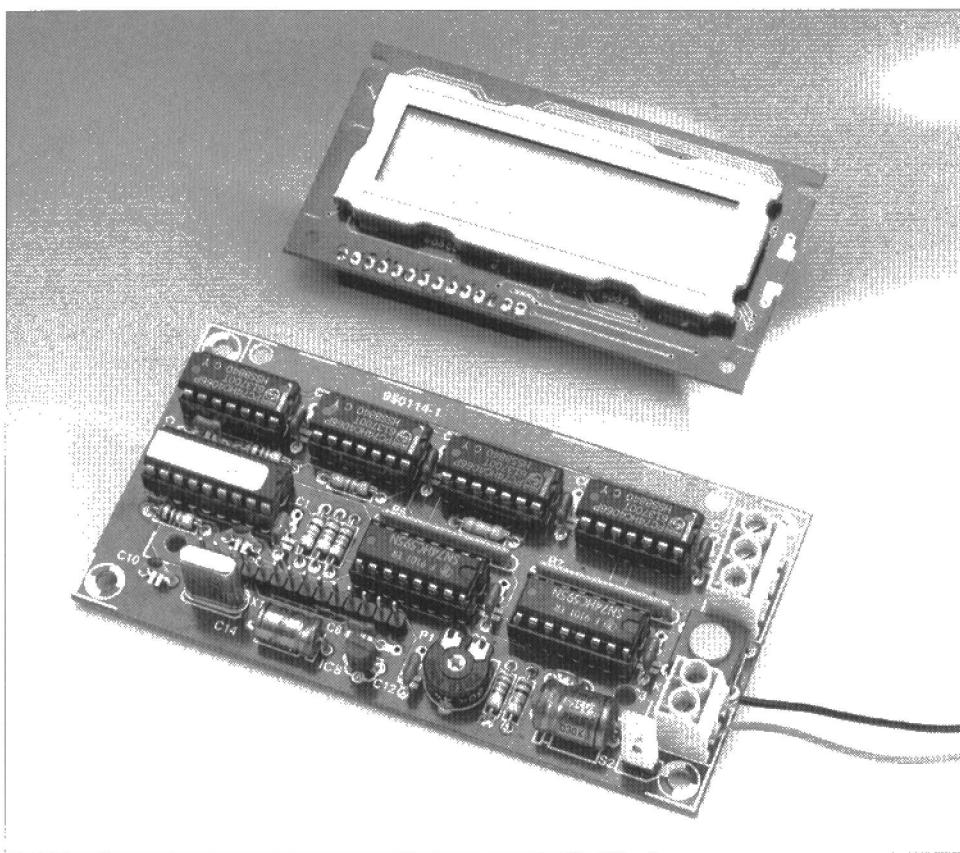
The finished prototype PCB and LCD module, which is simply fitted on to the single-row terminal strip (K₁) on the board.
